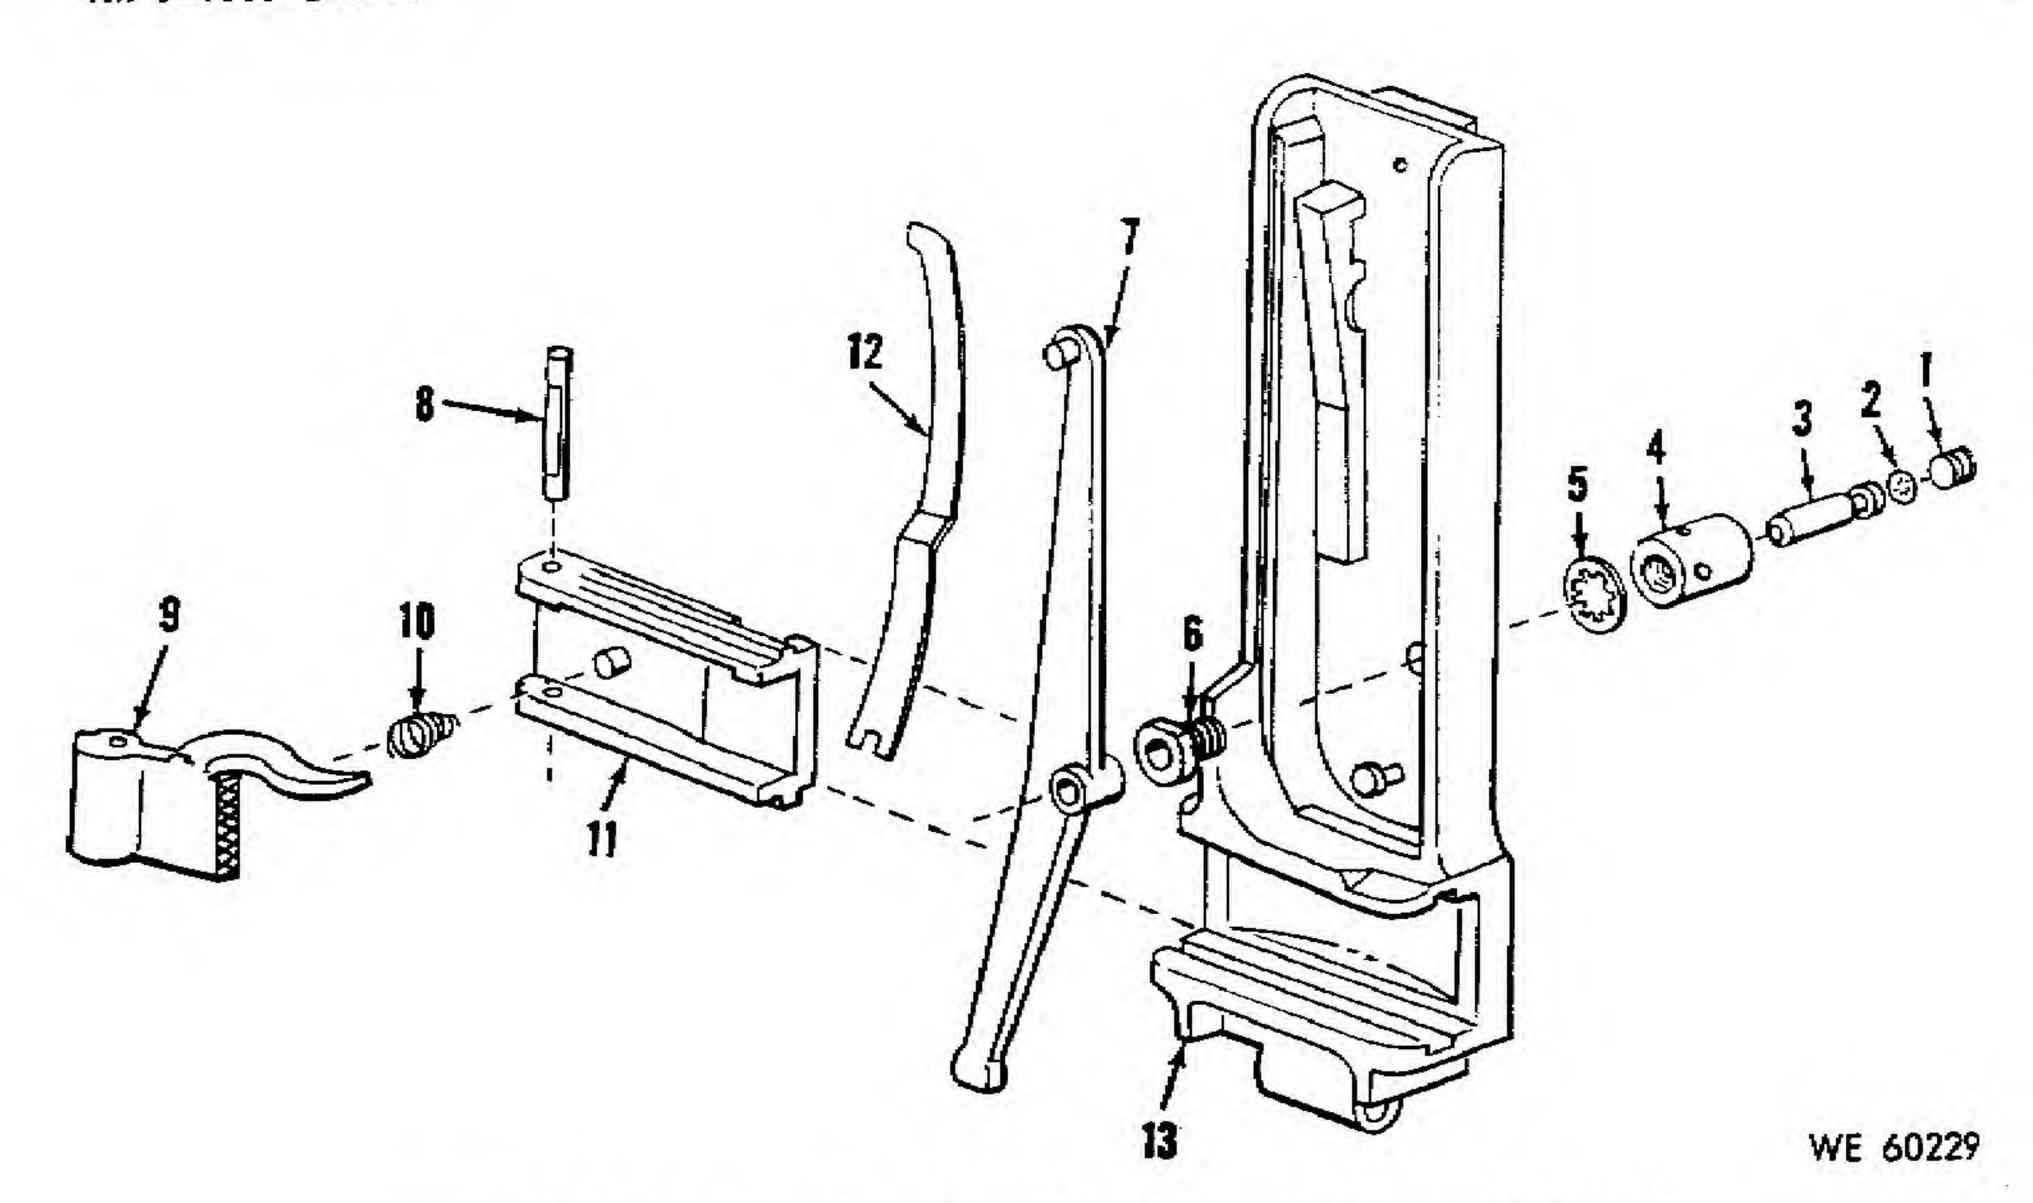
Cover group for Caliber .30 Machine Guns, M1919A4 and M1919A6 only—exploded view.
